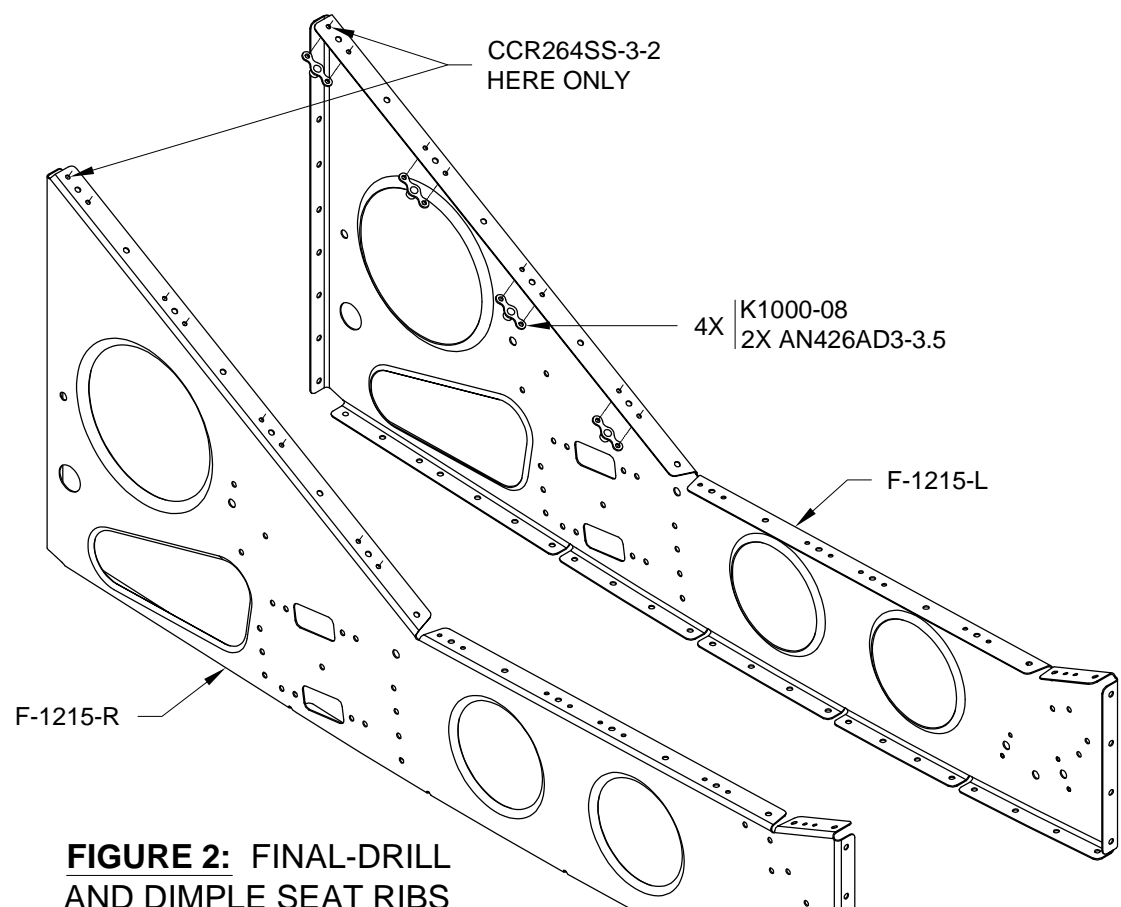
FINAL-DRILL AND DIMPLE SEAT RIBS
